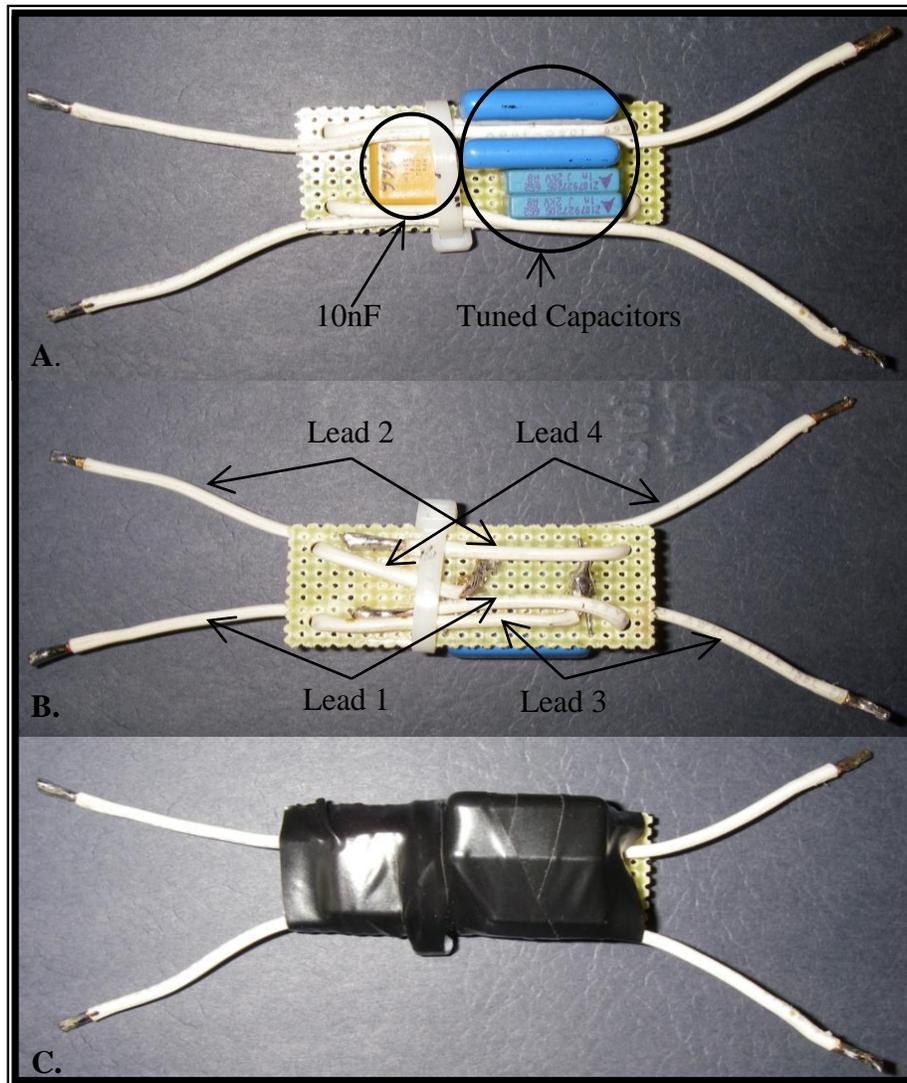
Assembled capacitor pack, A. Top view B. Bottom view, C. Protective electrical tape.
